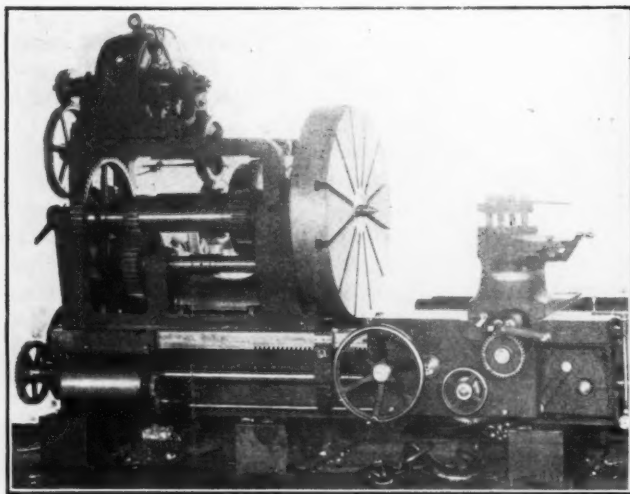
GEARED HEADSTOCK DRIVE UPON A 48-INCH POND LATHE.—15 H. P. WESTINGHOUSE MOTOR ARRANGED FOR VARIABLE-SPEEDS.
